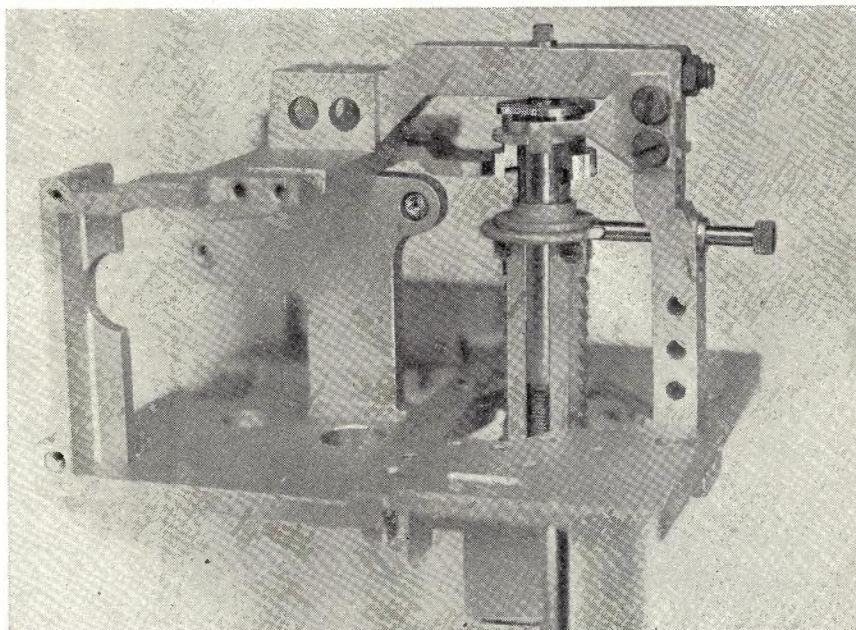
Datum Pin in position preparatory to making the four primary adjustments.
